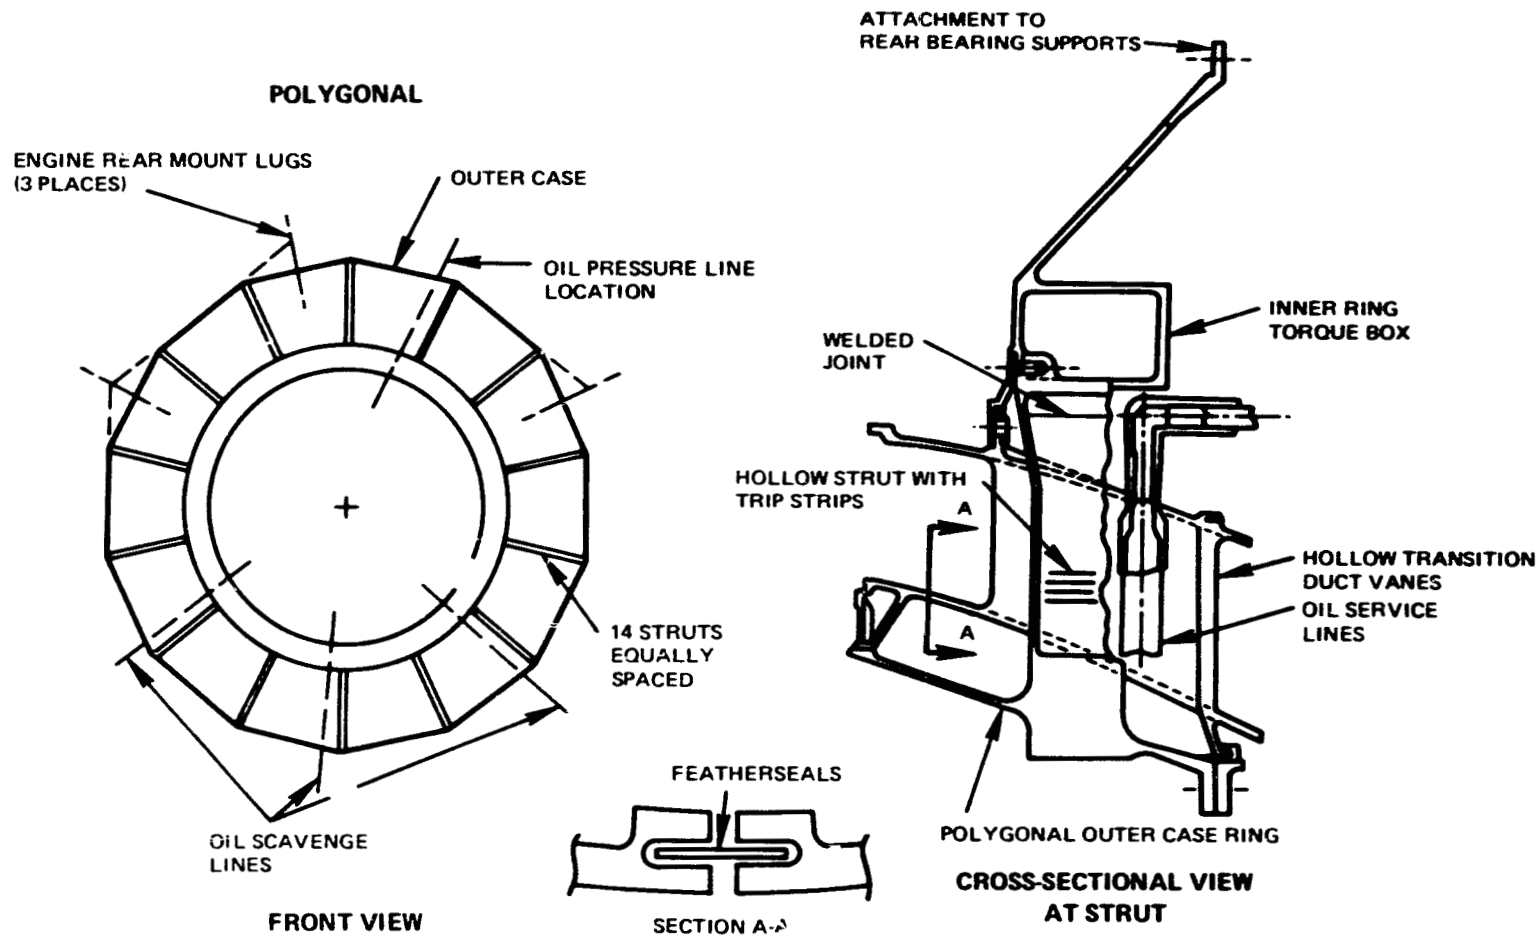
Turbine Intermediate Case. Drawing identifies major design features.
